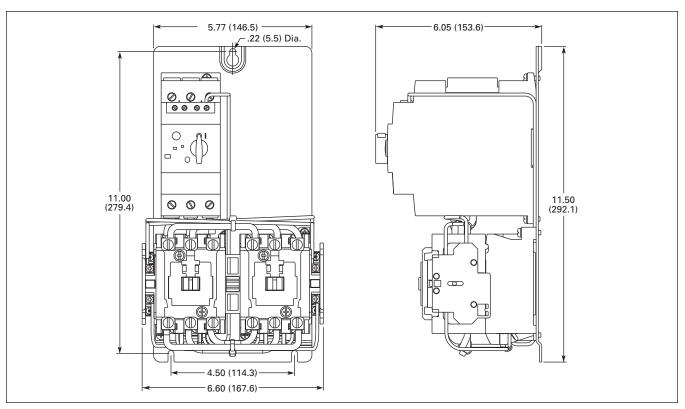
Reversing Combination Motor Controller AE358 (A308 MMP + CE55 65 mm Contactor) — Approximate Dimensions in Inches (mm)
